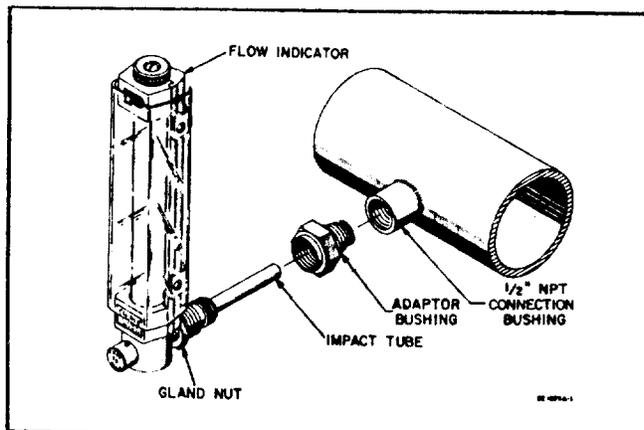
METHOD OF MOUNTING WITH BUSHING
